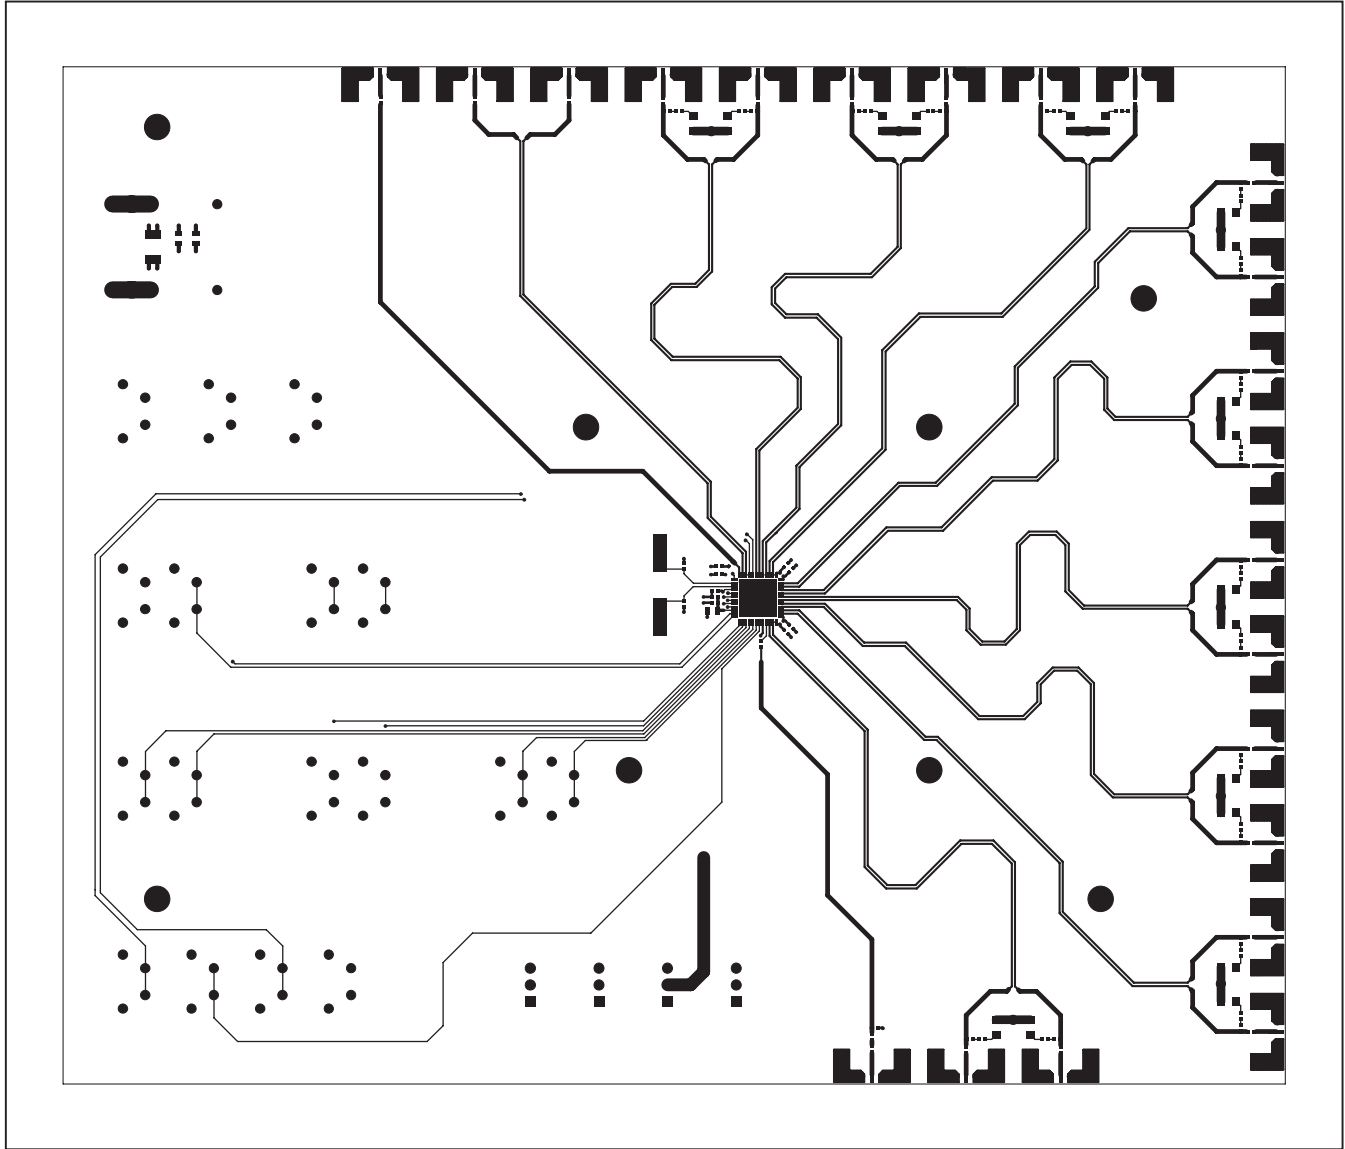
MAX3636 EV Kit PCB Layout—Component Side
